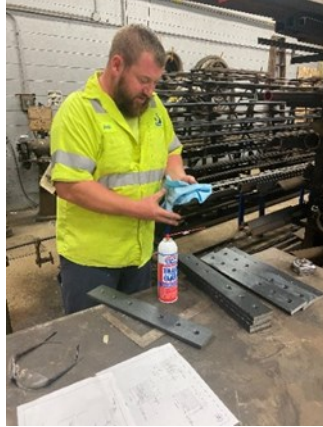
Josh (BCRD) fabricating steel plates in Road Department maintenance shop
